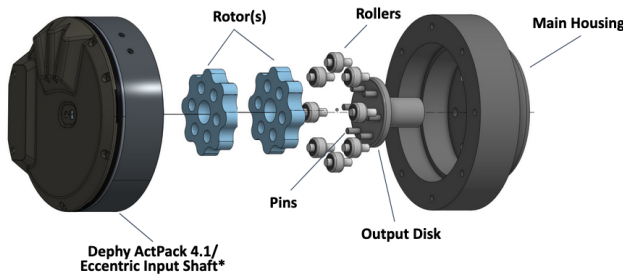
Exploded view of the CycloStride transmission assembly. The Dephy ActPack motor serves as the input, driving the eccentric shaft. For clarity, the shaft and one roller are omitted. A double cycloidal disk (rotor) assembly reduces vibration. This compact design achieves the target reduction with low backlash and high efficiency for precise prosthetic knee control.
